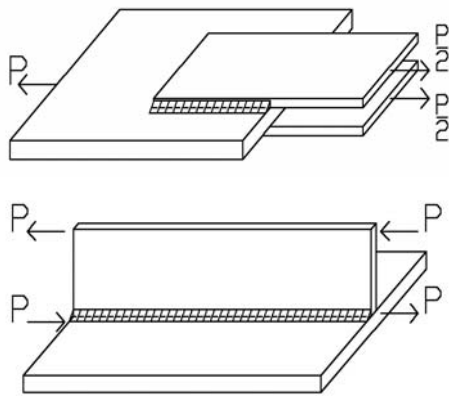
Shapes of longitudinal fillet welded joint and load direction
